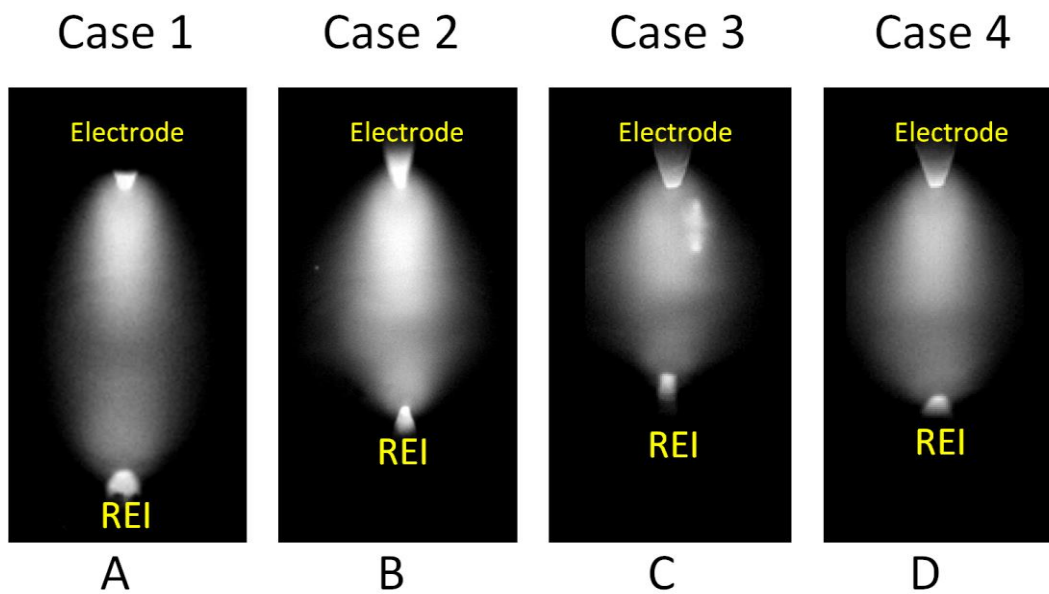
Reversed electrode image of case 1-4 at 20 second after welding started
